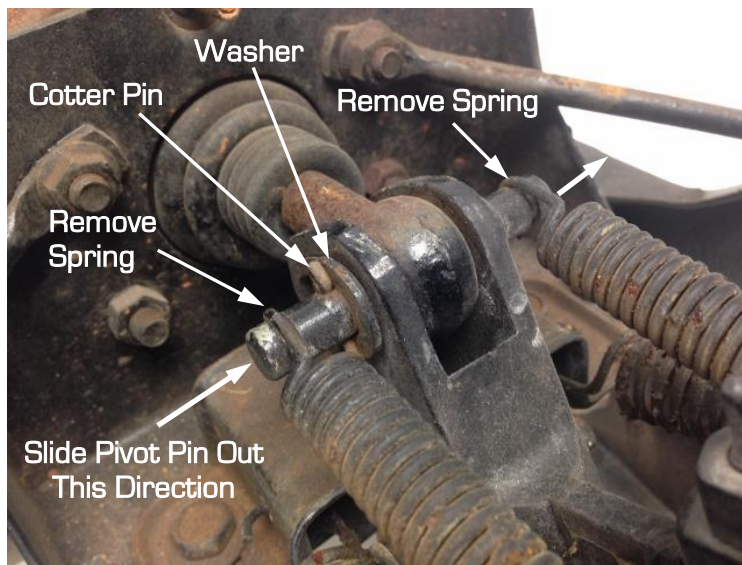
Remove Actuator Springs, Cotter Pin and Linkage Pin
